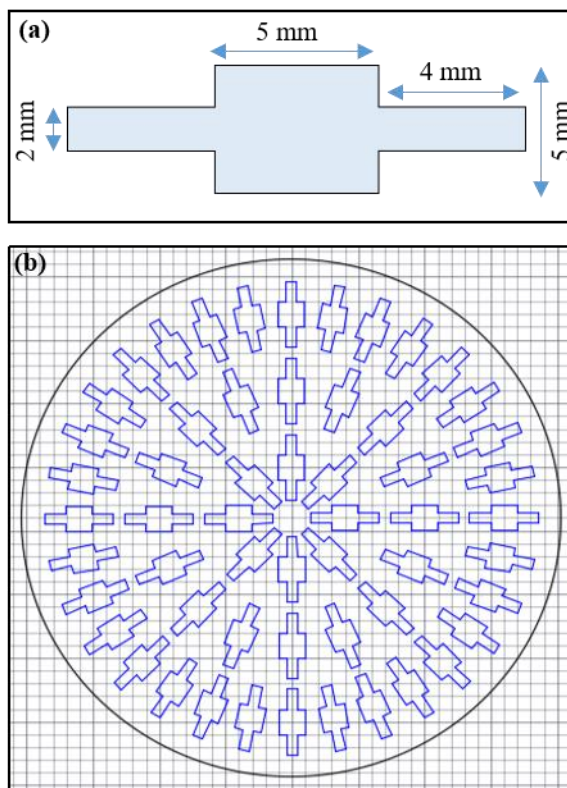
(a) Dimensions of the thin film PDMS cantilever design. (b) The laser engraving pattern that is engraved onto the wafer.
